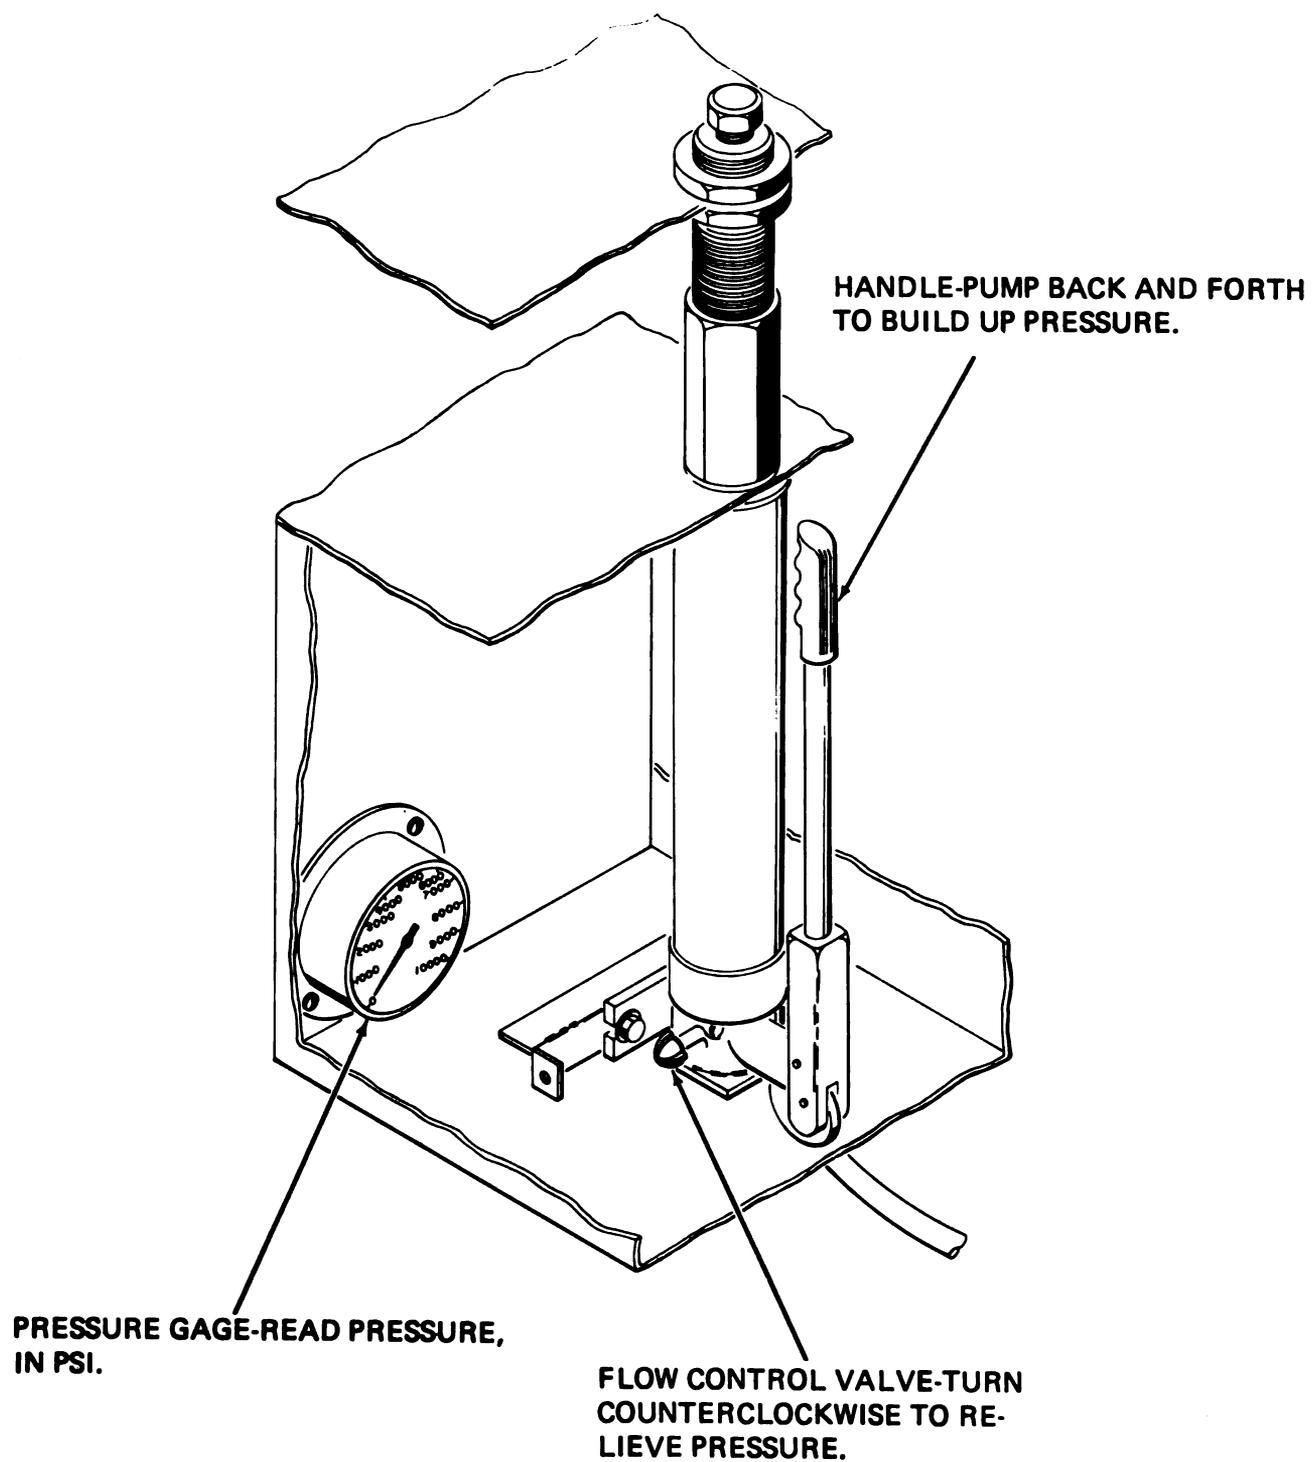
Hand Pump Flow Control Valve, Handle, and Pressure Gage.
